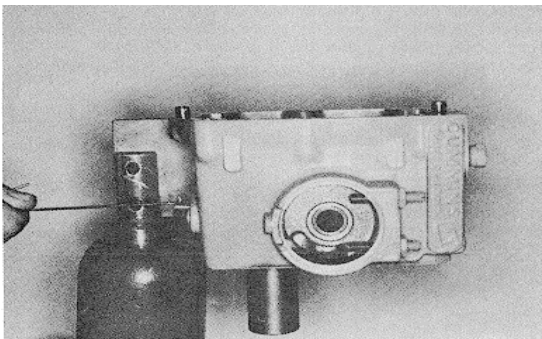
, F5135. Removing locking pin from bottom of barrel
